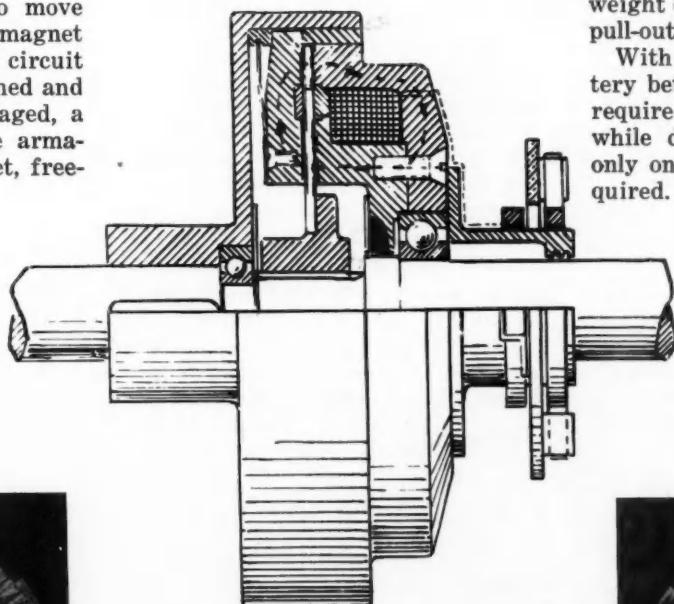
Assembly drawing of Payne magnetic clutch, showing magnetic circuit
